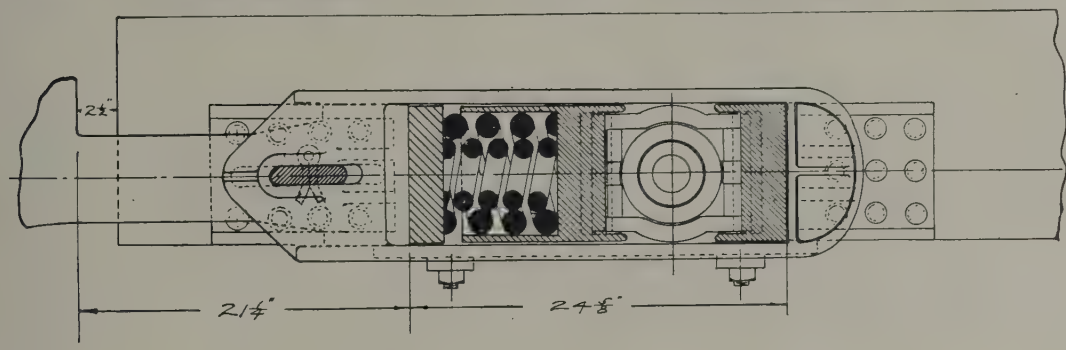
Butler Friction Draft Gear No. 35Q Applied to Freight Car.
